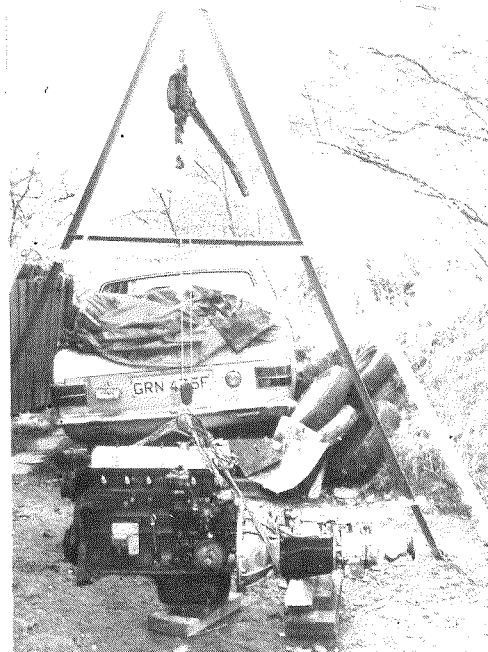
The engine and gearbox ready for fitting as a complete unit. Note the swing frame being used as a gantry
